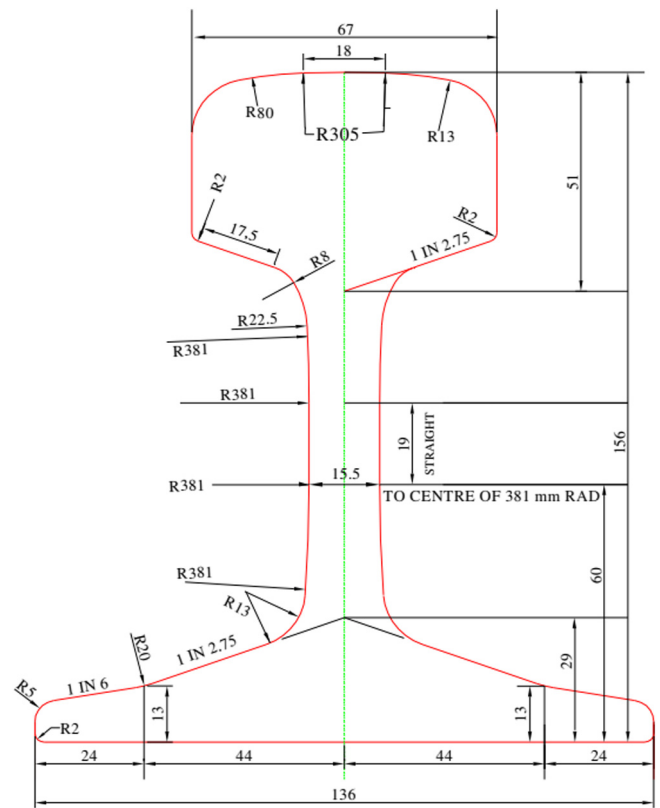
Detail dimension of the cross-section of IRS 52 (RDSO Ministry of railways, 2009).
